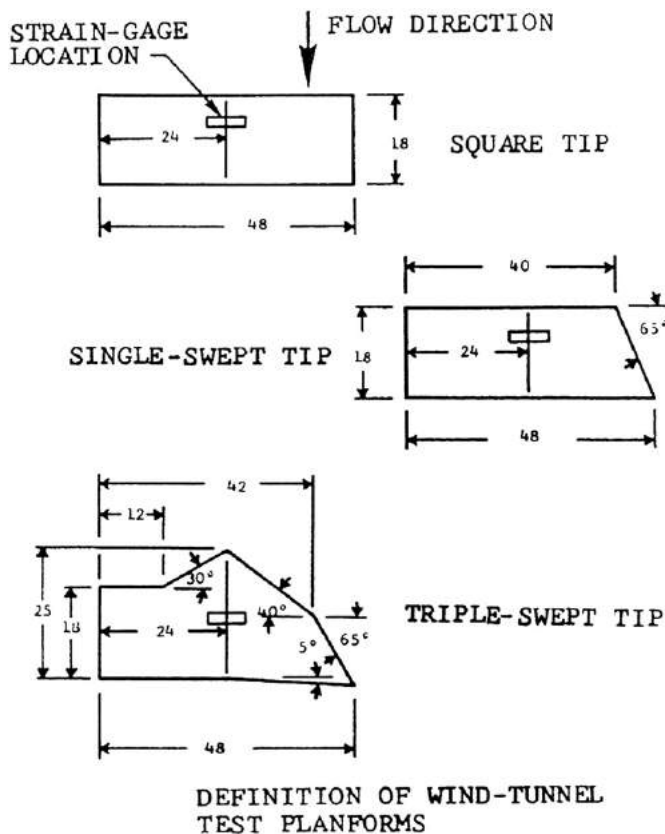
Design of swept tip rotor blades, Spivey [68].
